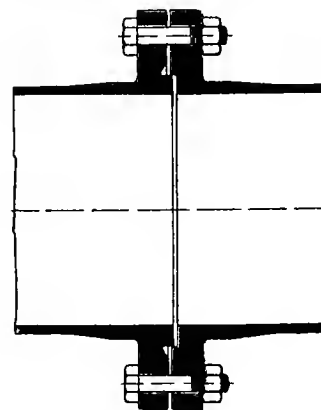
Welded on Flanges and Form of Joint on the Straight Pipe.
